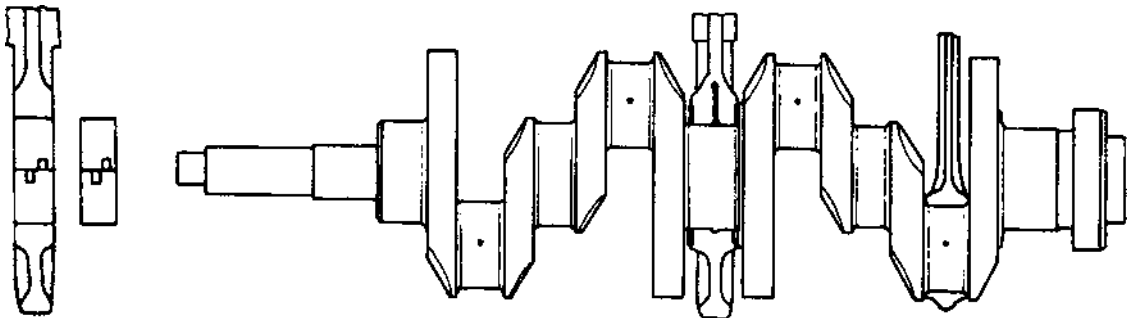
Crankshaft and bearings (Alfa-Romeo)
